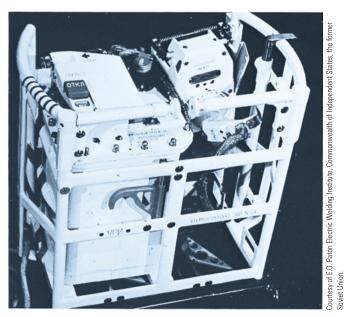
Machine designed to be used to weld in space.
